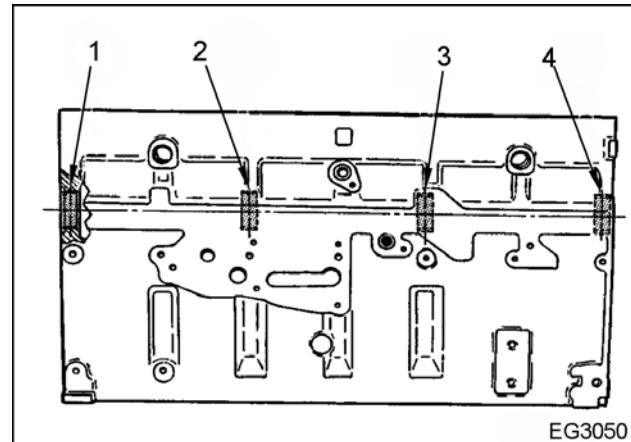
Camshaft Bushing Service Set (ZTSE2893B)
